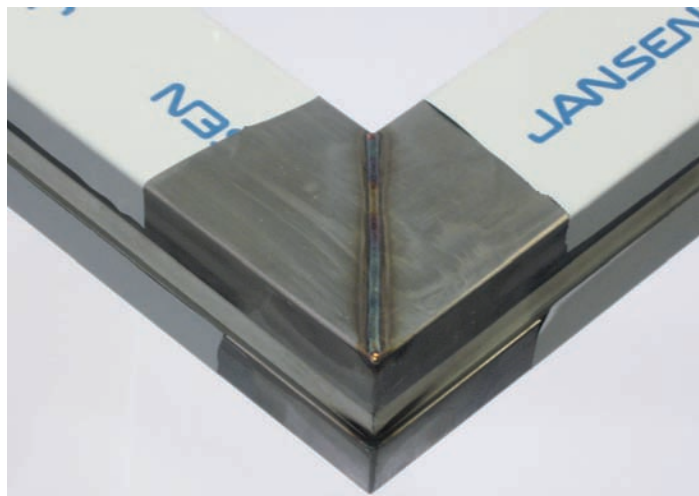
WIG/TIG profile corner welded without additional wire
